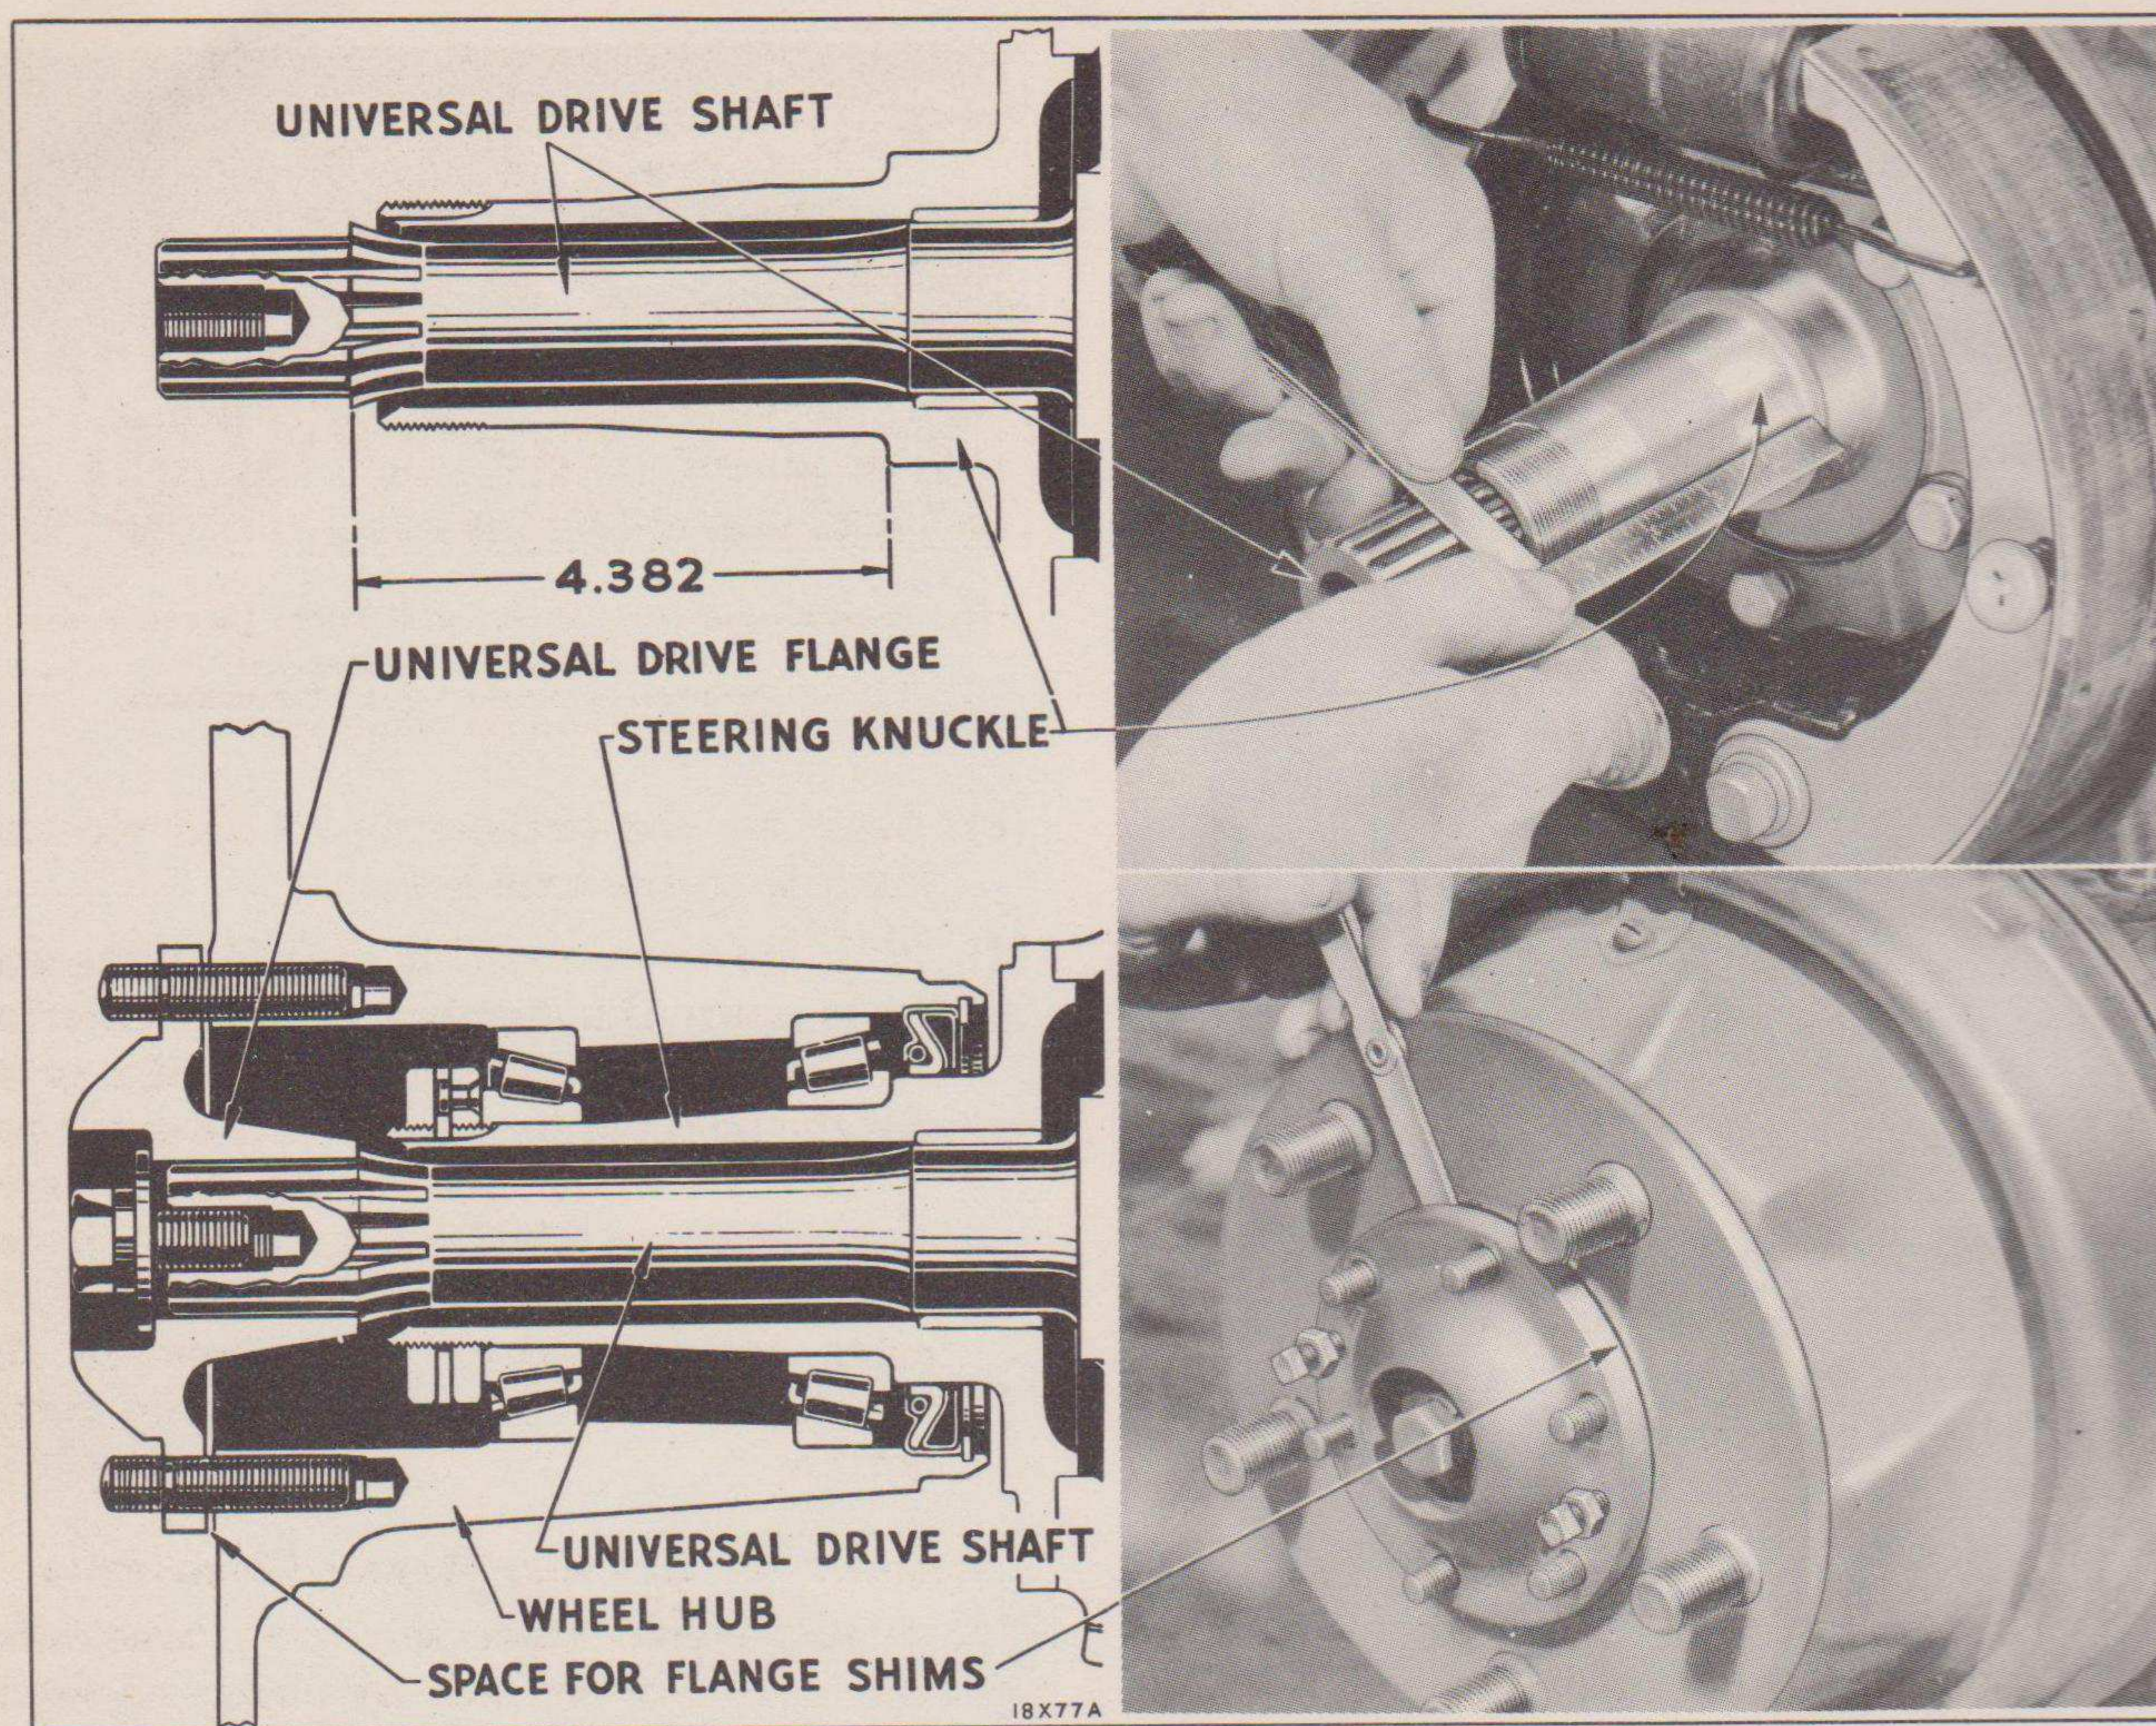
Front Axle Shaft End-Play Adjustment (Bendix-Weiss only)
